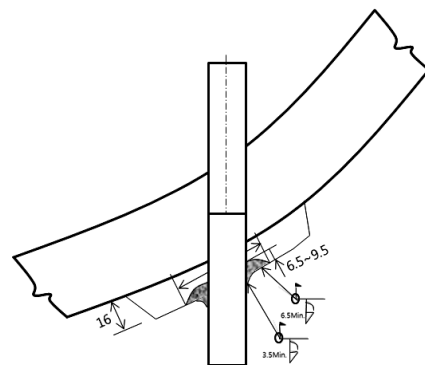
Weld shape condition of J-Groove overlay welding requiring in ASME Code
